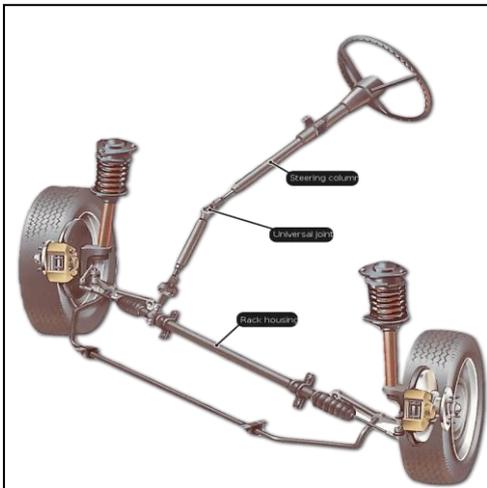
A typical rack-and-pinion steering layout, showing how the rack acts directly on the road-wheel steering arms.
